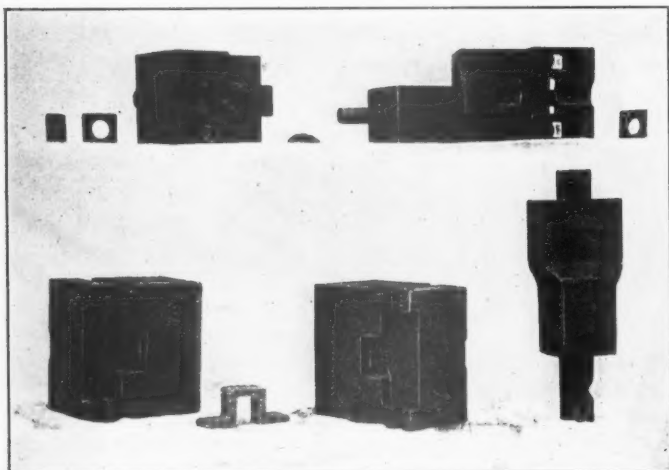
DIES AND HEADERS FOR MAKING WASHERS AND A SIMPLE FORM OF BUCKLE.
